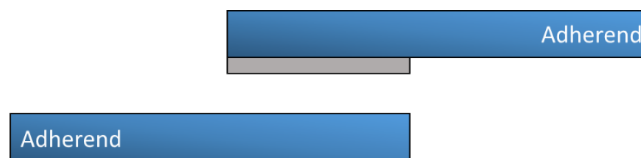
Adhesive Failure of Bonded Lap Joint
